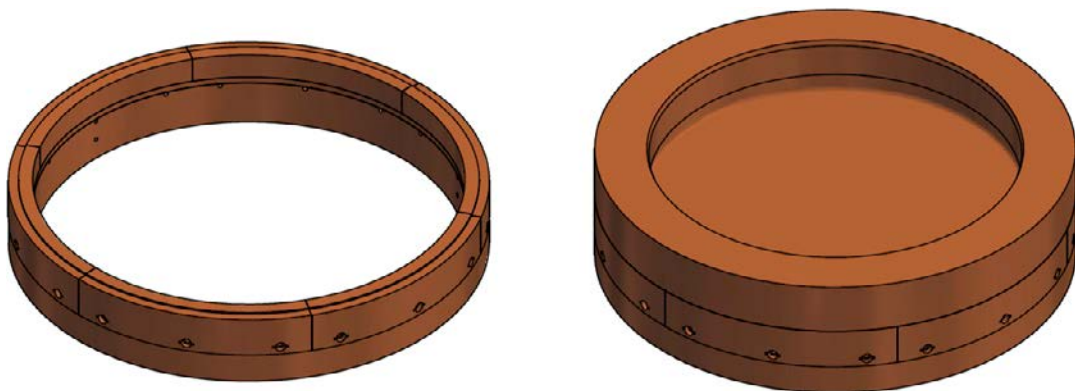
A sketch of the six segments placed on the supporting ring, left, and the assembled lid and ring intended for welding, right.
